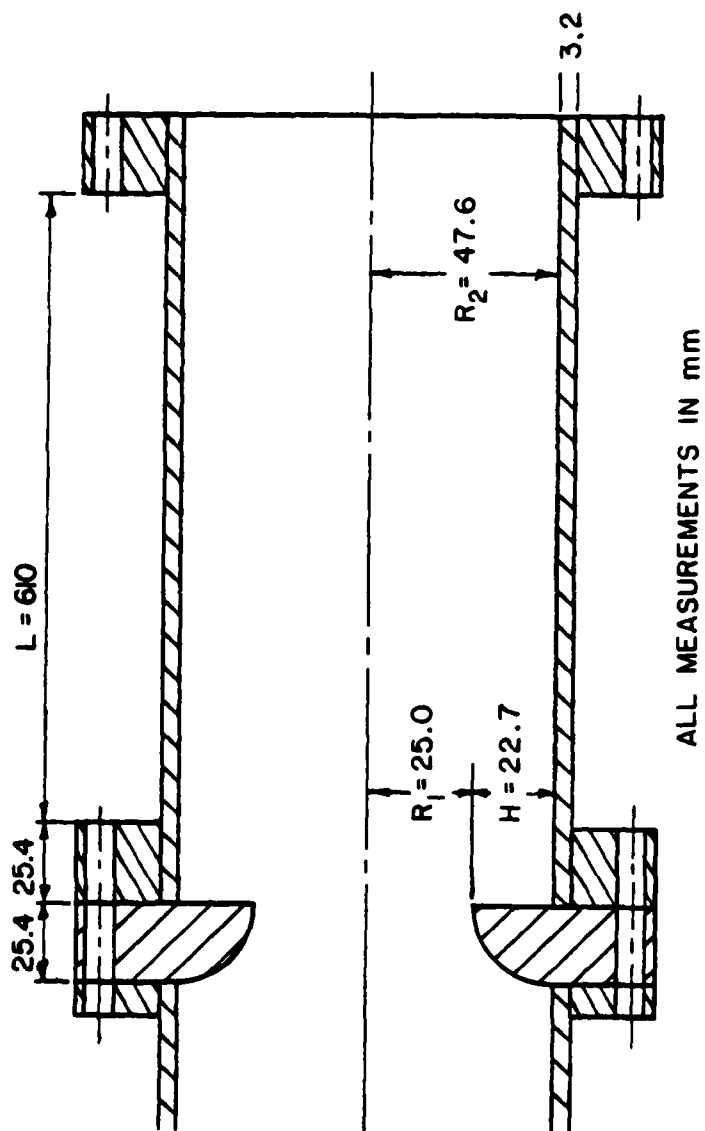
Geometry of Test Section with 1.90:1 Nozzle
